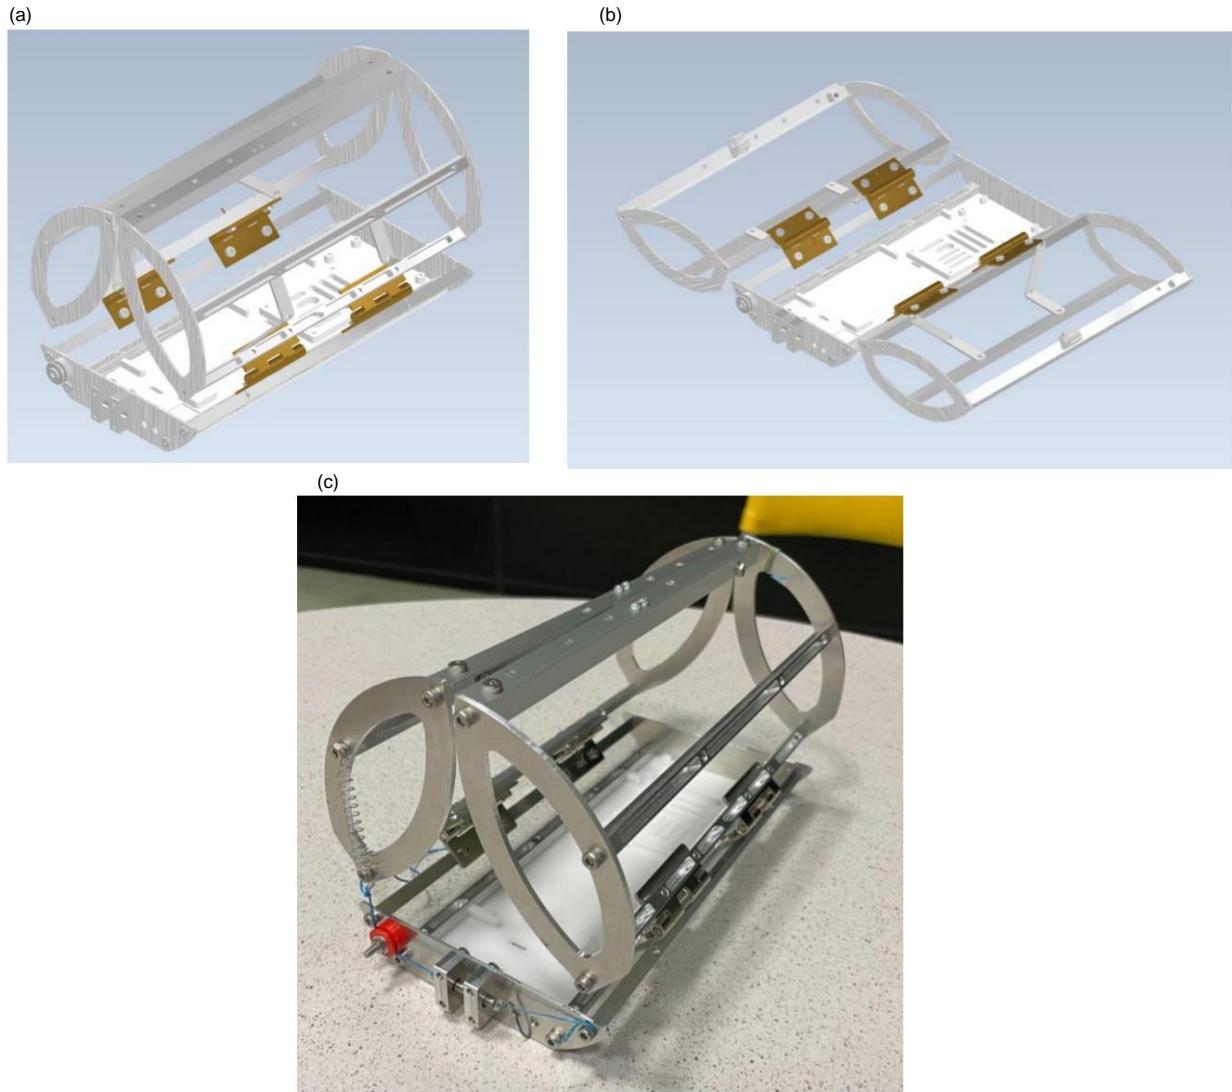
Cover part (a) Before deployment (CAD), (b) After deployment (CAD), (c) Actual machine
